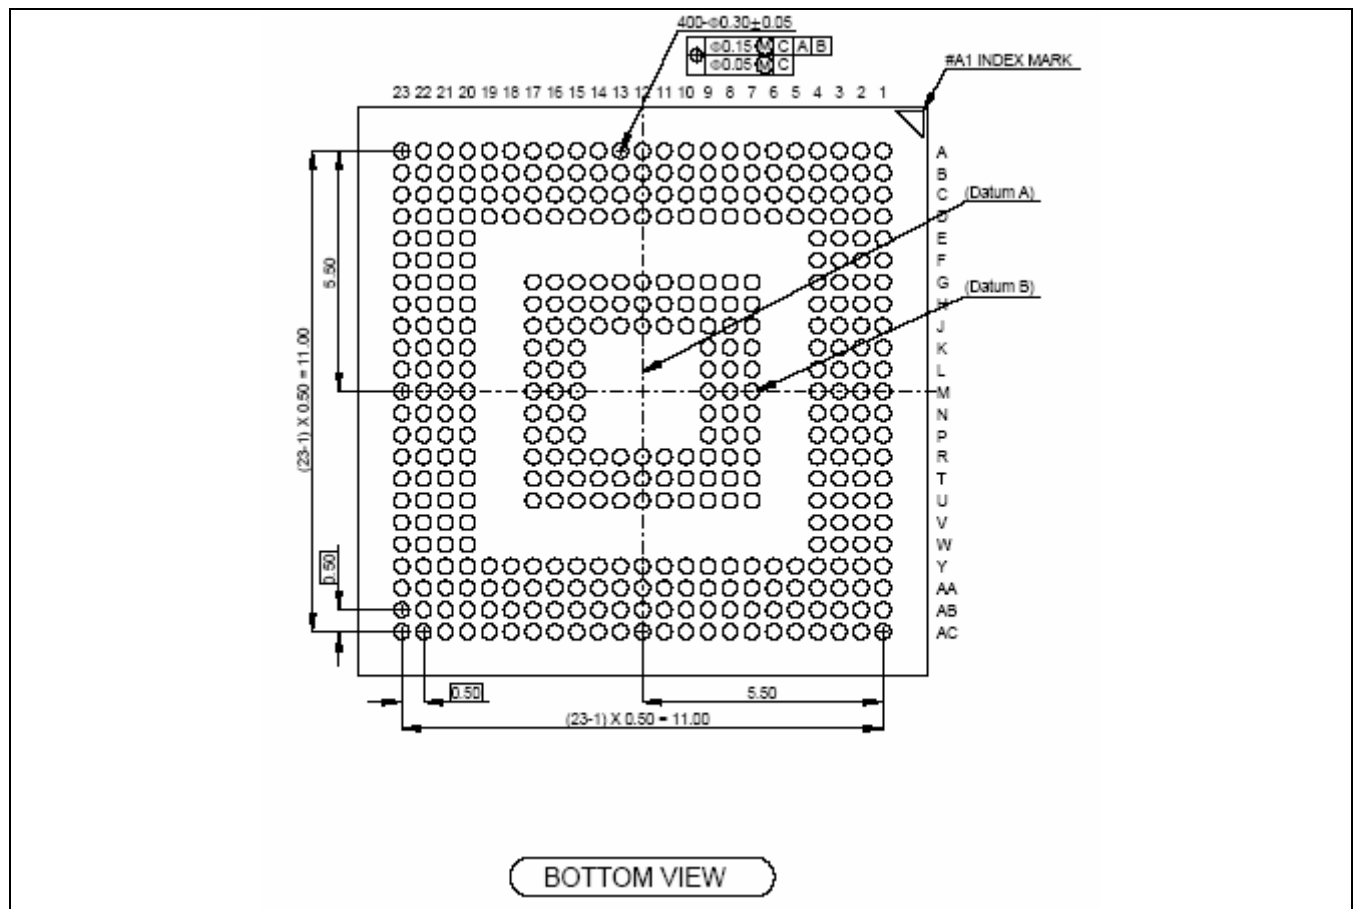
400-FBGA-1313 Package Dimension 2 (Bottom View)
